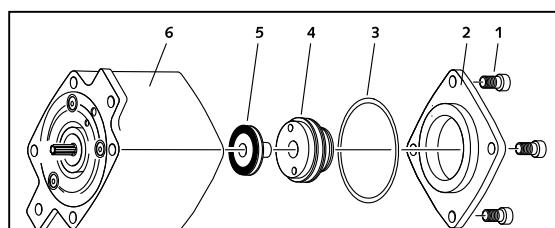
Remove the brake assembly from the housing and exchange the brake disc if required.
